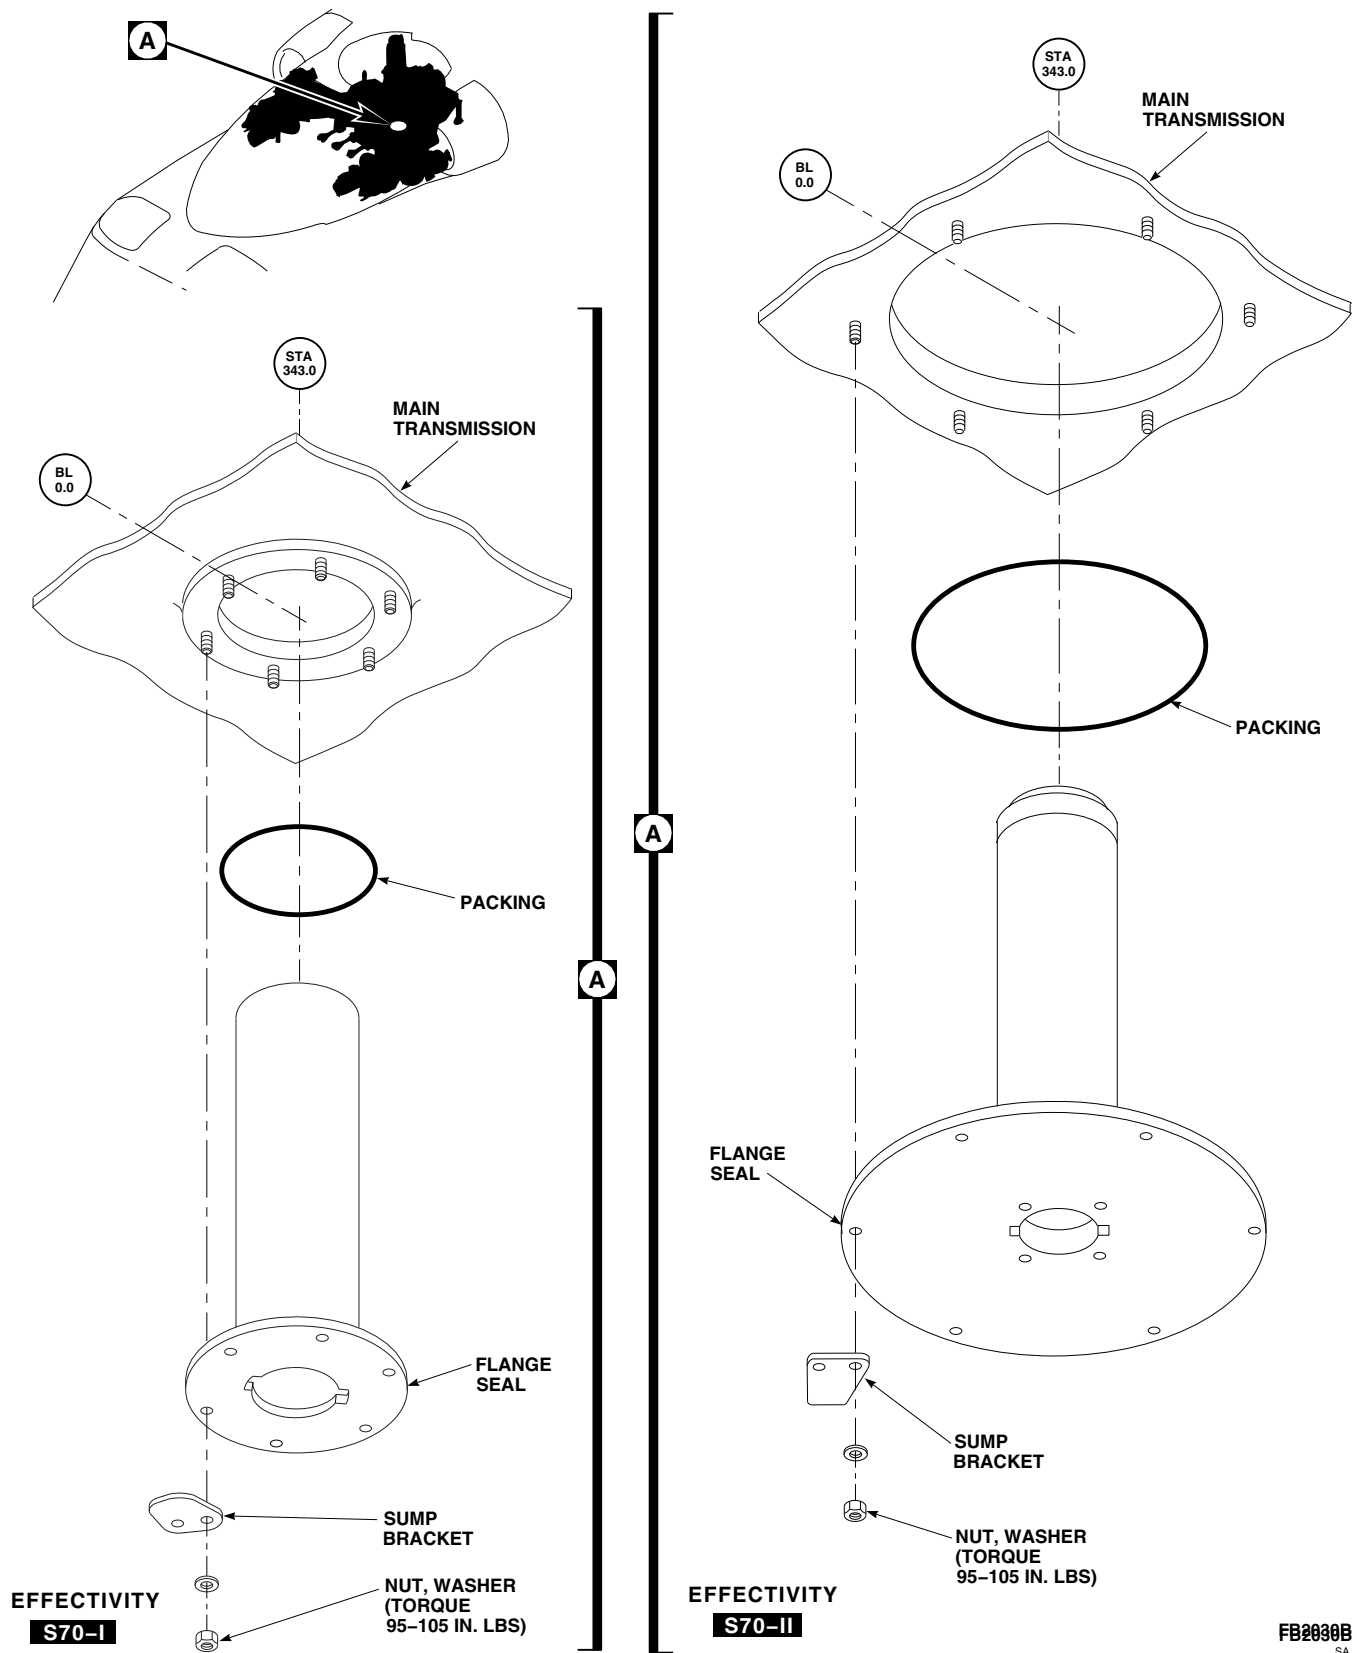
REPLACE BLADE DEICE FLANGE SEAL AND PACKING
